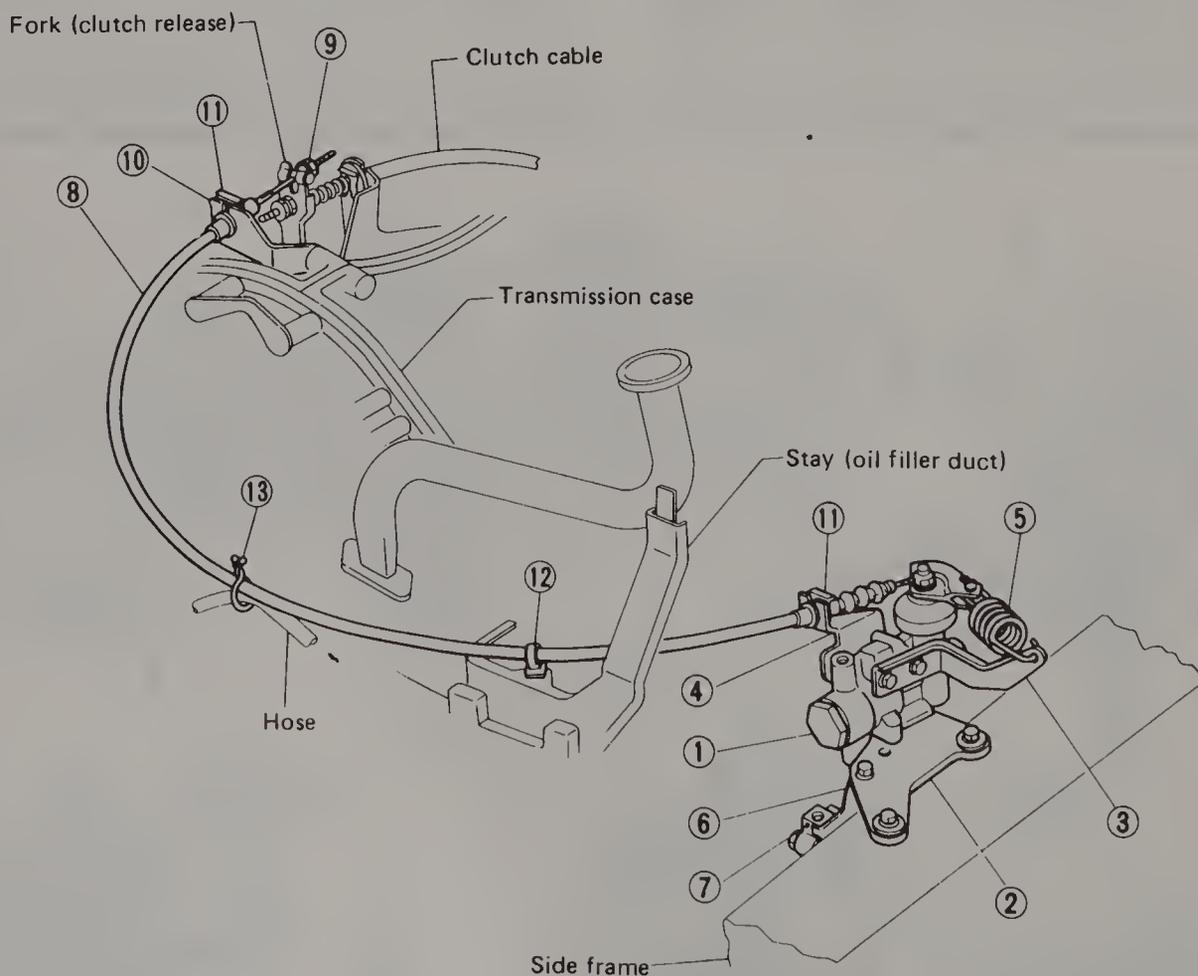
Hill-holder components – installed view (Sec 19)
